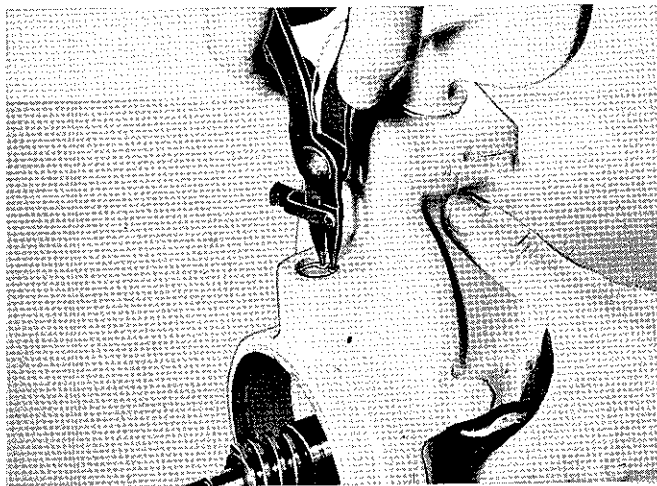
Removing Internal Retaining Ring from Brake Pawl Bore
